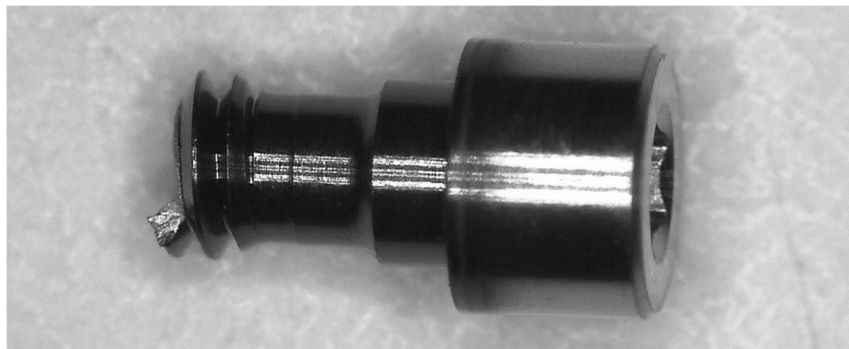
Fatigue failure of the new design of the screw at the first engaged thread.
